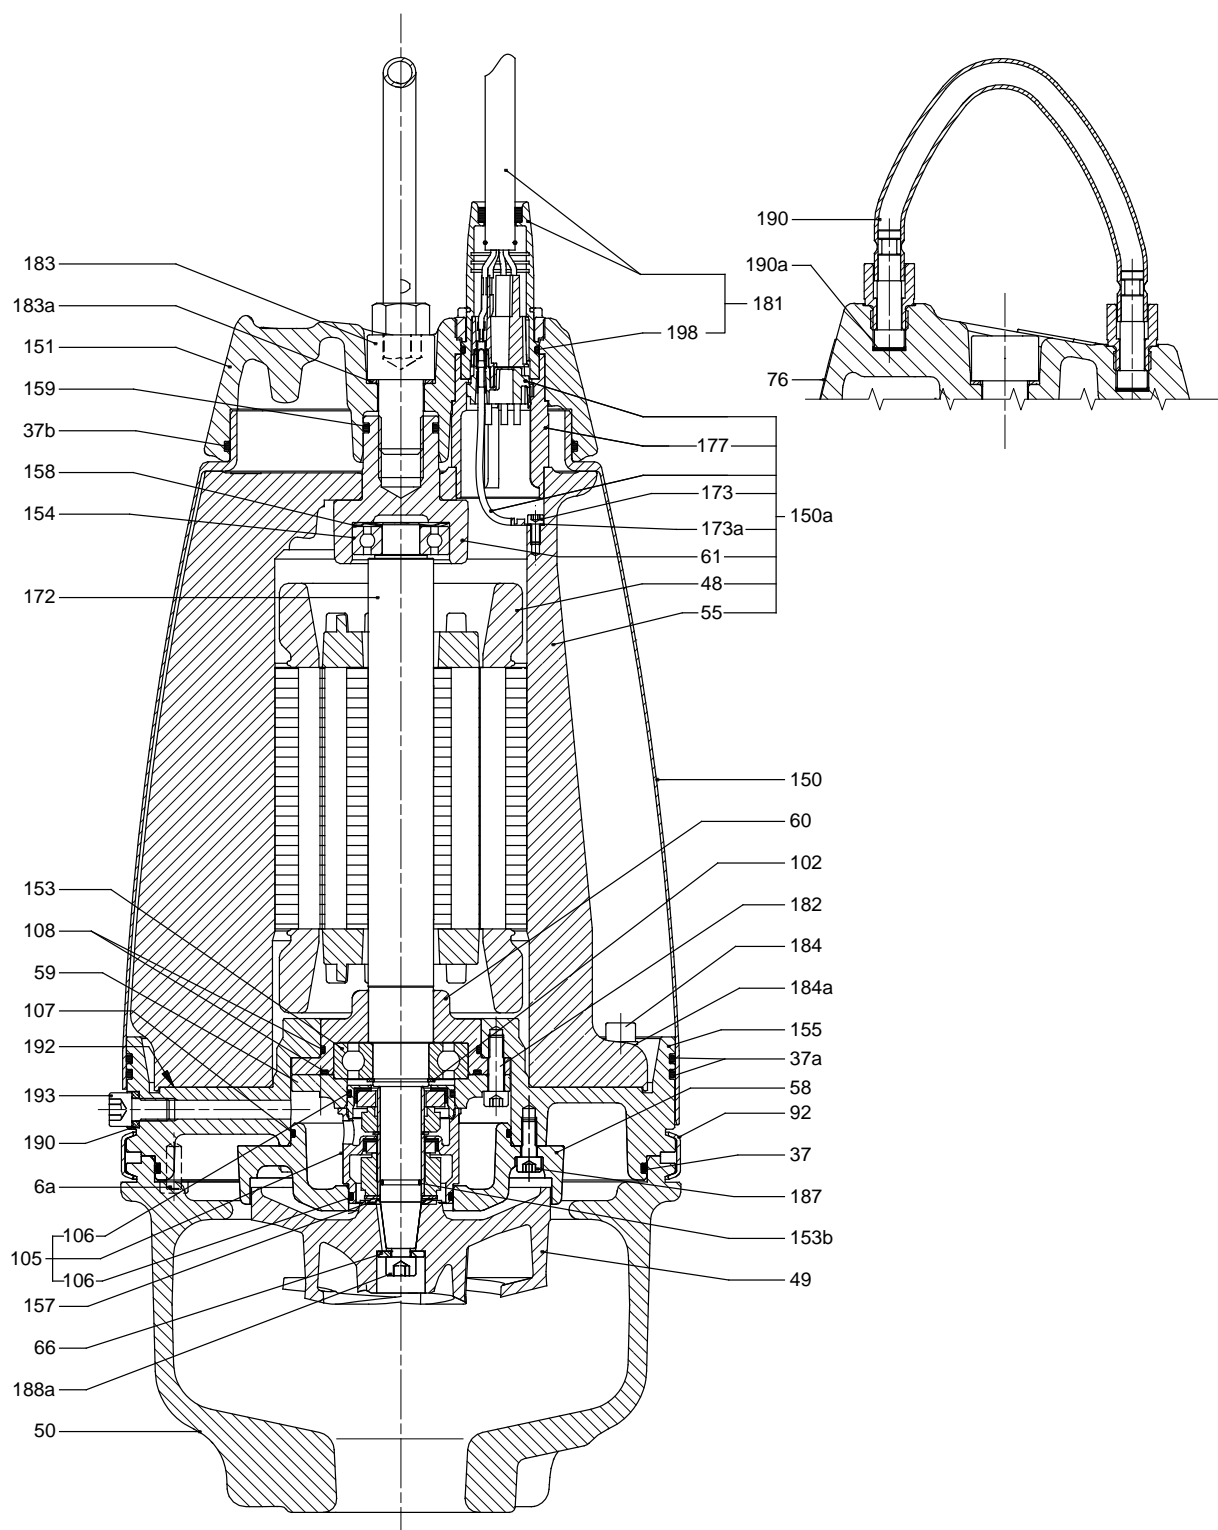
Sectional drawing, SEV pump with SuperVortex impeller
